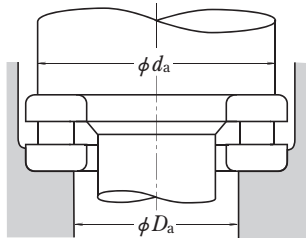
Face Supporting Diameters for Thrust Roller Bearings
